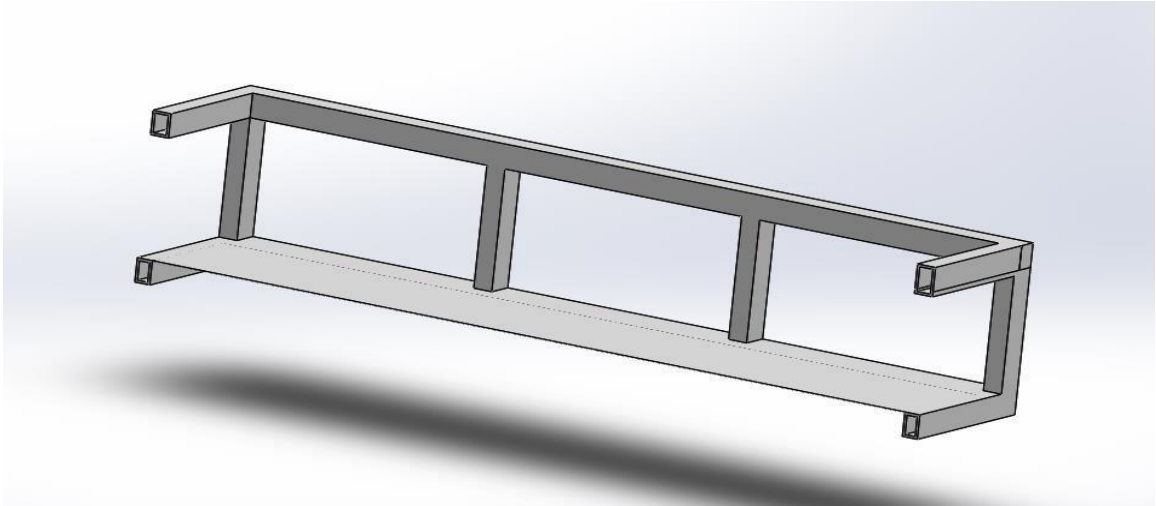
The cross-section of Trailer, involving shells in its assembly.
